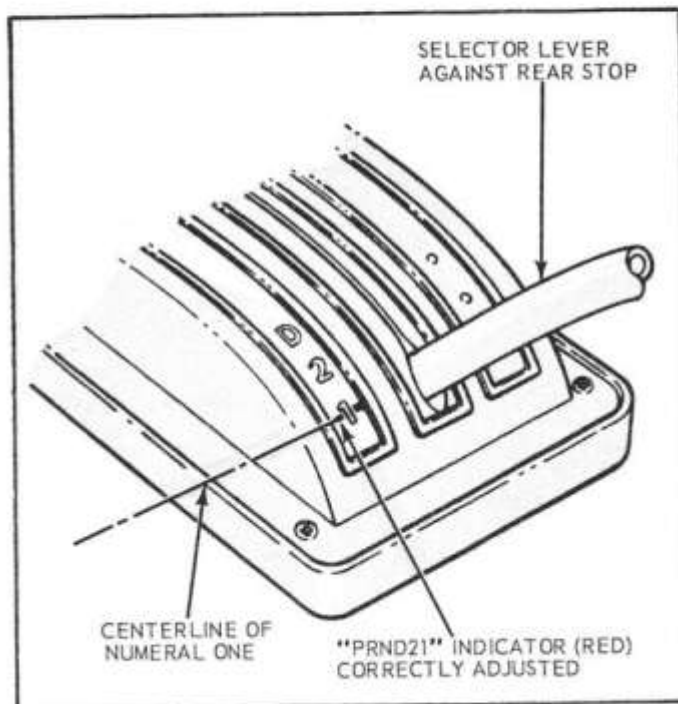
Transmission Shift Lever "PRND21" Indicator Adjustment 9035A
